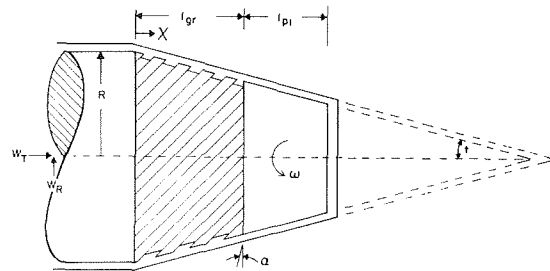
Conical-Shaped Spiral-Grooved Grease Bearing
